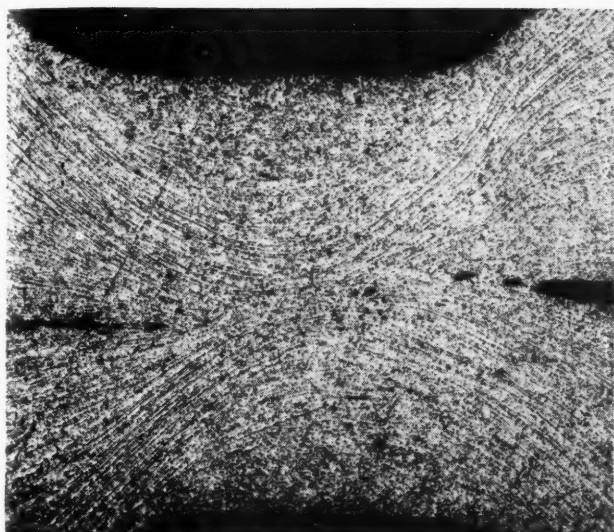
A micro-section of a typical cold pressure weld in aluminum, showing lines of flow
